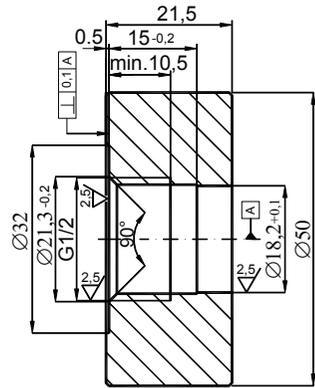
Weldable fitting ring for use with transmitters with CG1/2 - type connector
